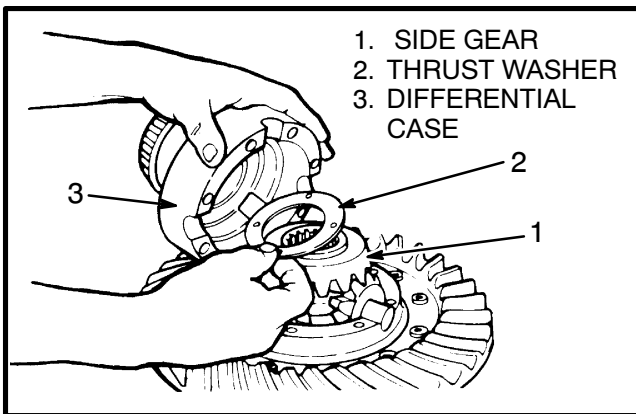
INSTALL THE SECOND SIDE GEAR AND THRUST WASHER
